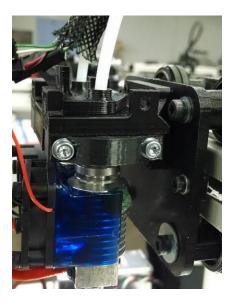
Print Head Clamp Bolts (blower removed for clarity)
